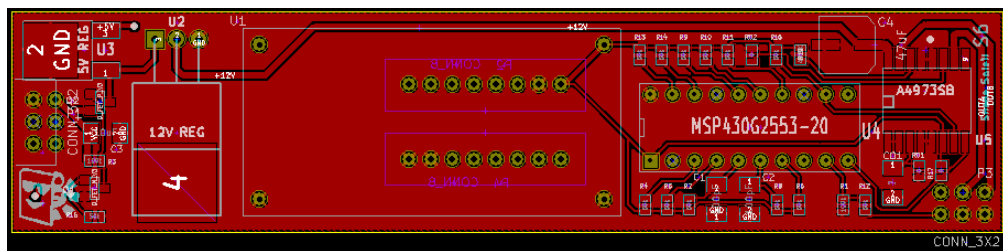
Top layout for PCB S6. This board is 25.4x114.3 mm (x1" x4.5").
